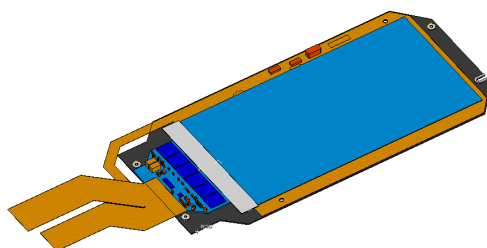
Drawing of a CMS barrel module. One can distinguish the carbon-fibre frame with the silicon sensors and their readout electronics.
